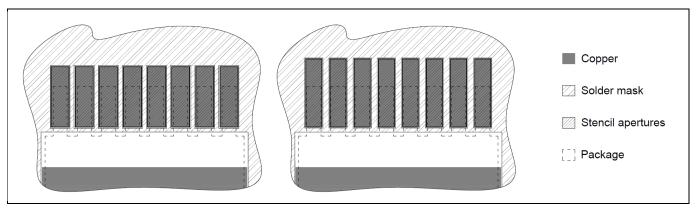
Footprint and stencil variations for top-side cooled HDSOP-16-1 (TOLT) package with negative stand-off. Both variants provide the same amount of solder that is necessary for proper solder fillet formation. The right design is preferred due to the elimination of flux bridges after component placement.
